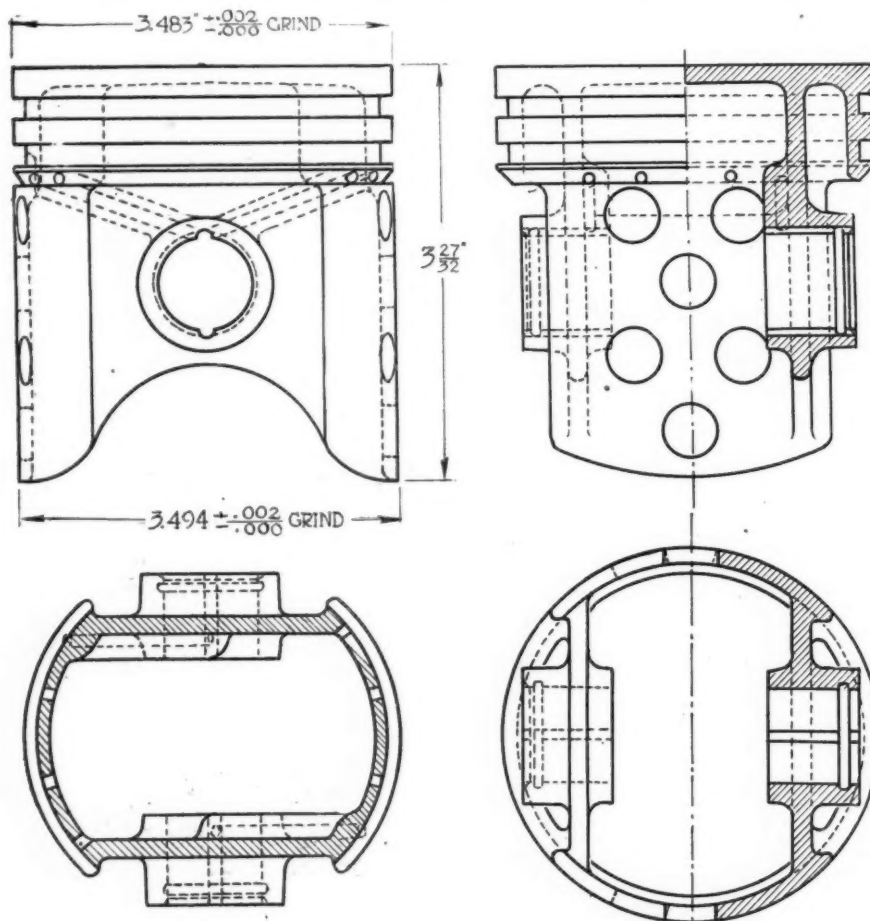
Dimensioned drawing of a successful aluminum alloy racing piston
